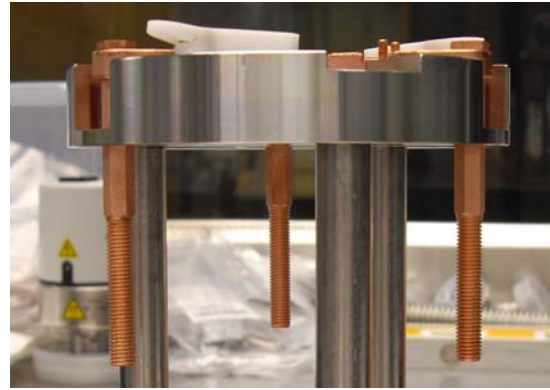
(color online) Detector mounting plate with the hex rods in the mounting fixture.
